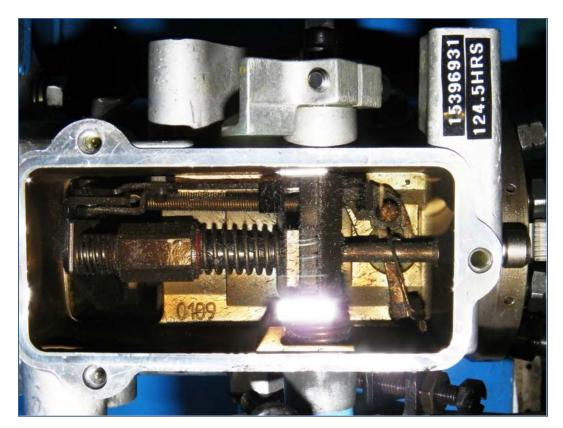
Test 5, Pump 1 (Operating Pump Removed from Testing) Linkage Debris
